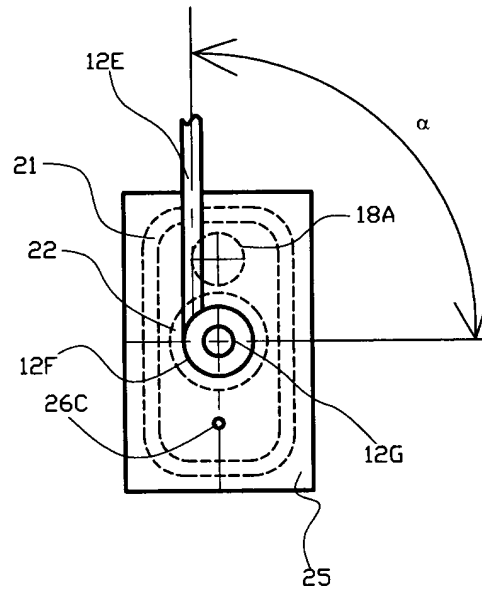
B A-A sectional view of piece 25 of the drug feeder 2
